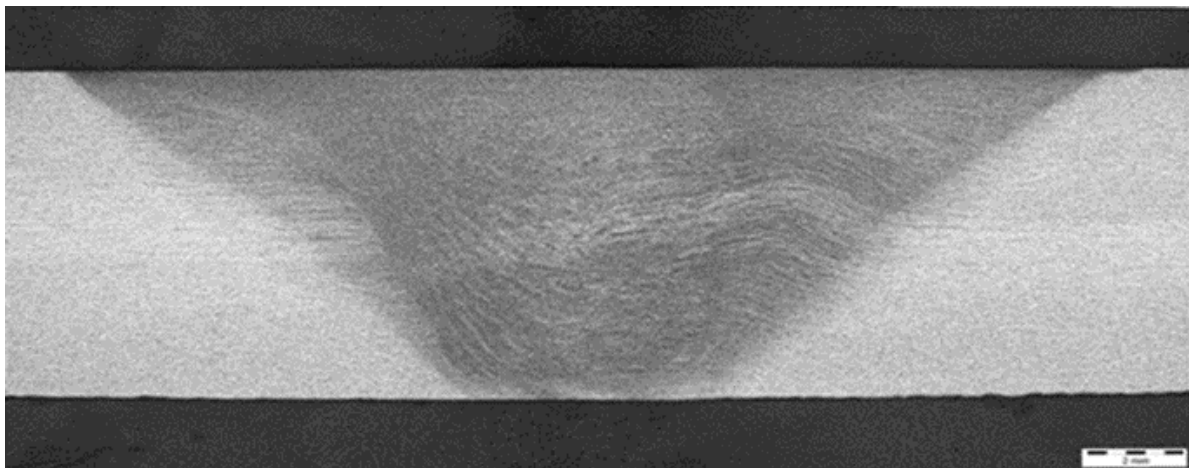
Metallographic section through a single pass, square butt, friction stir weld in carbon steel
